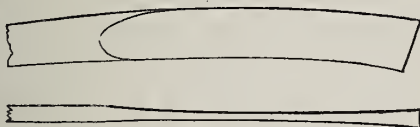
shows a side elevation, and a plan of the parting tool. It is made of a piece of flat steel, and ground hollow on the sides that it may clear the work while passing through. This tool may also be used for cutting grooves round a cylindrical piece of work. When the parting tool is intended for such work as cutting through the face of a plate to reduce its diameter, it should be made narrow, and ground thinner at the bottom than at the top. This tool is sharpened by grinding the top surface.
